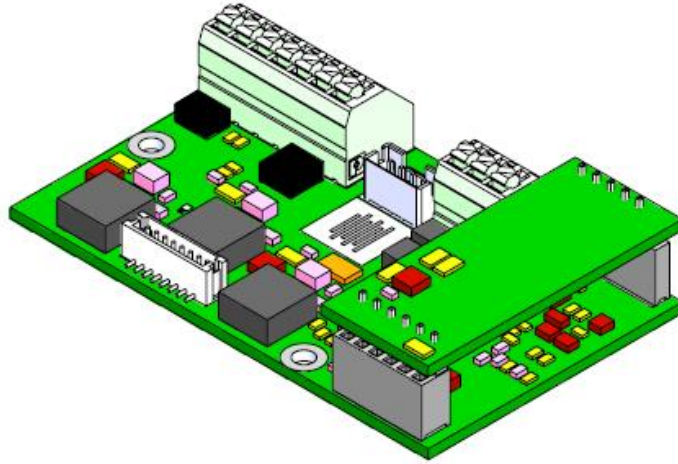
DMX 512-A card plugged in to 0-10V driver board
